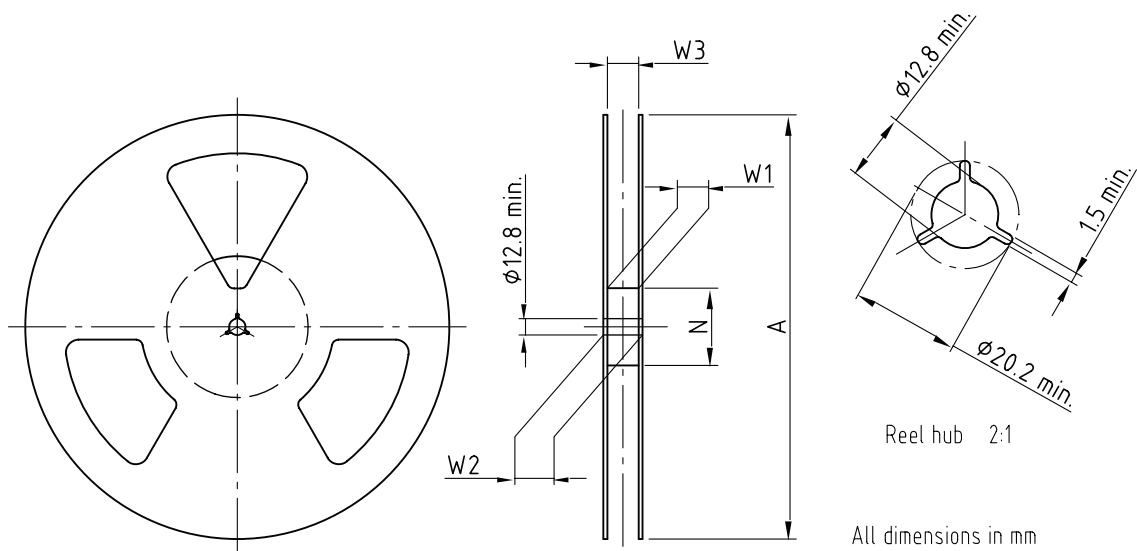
Mechanical drawing, dimensions in mm, tolerance ± 0.2 mm if not otherwise shown
